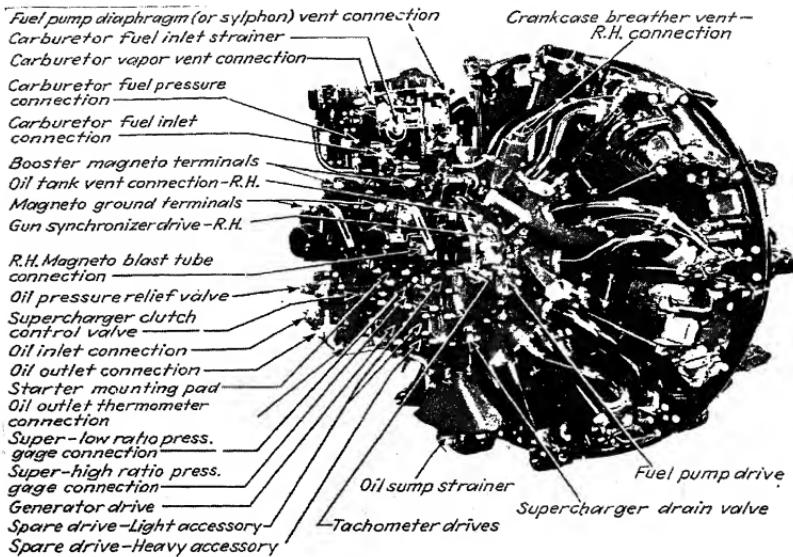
Three-quarter left rear view of Wright 14-cylinder Cyclone engine.
